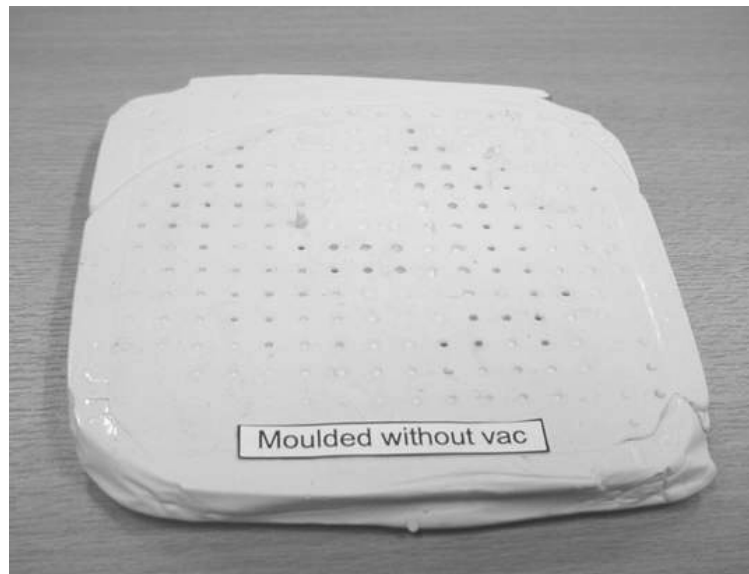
Ceramcor moulding trial showing zero pin formation due to trapped air
